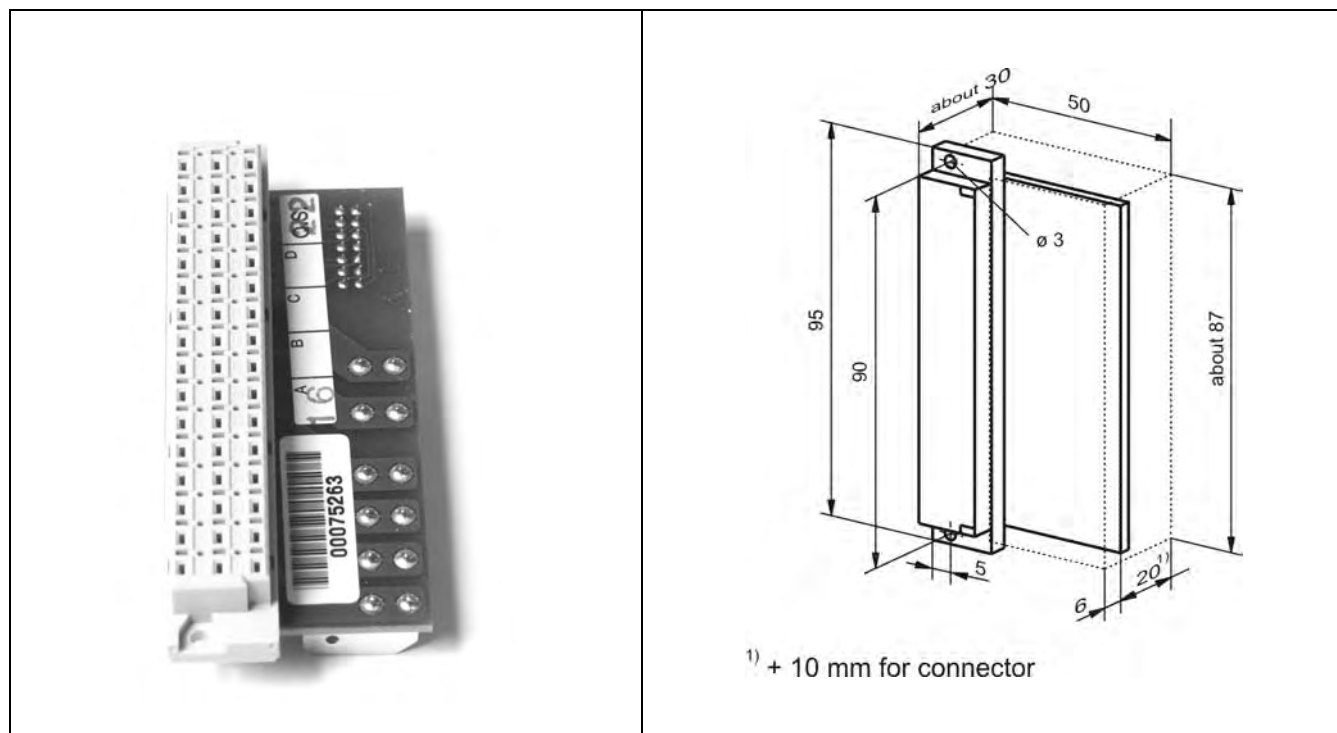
Adaptor board G-PAB with dimensions (in mm)
